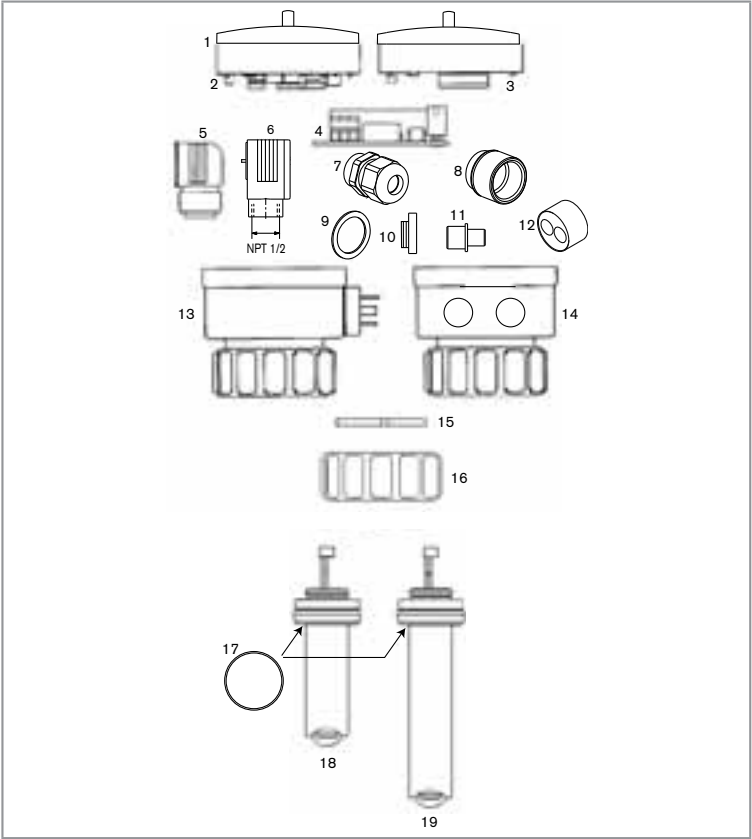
Exploded view of the spare parts of a 8025, compact version
